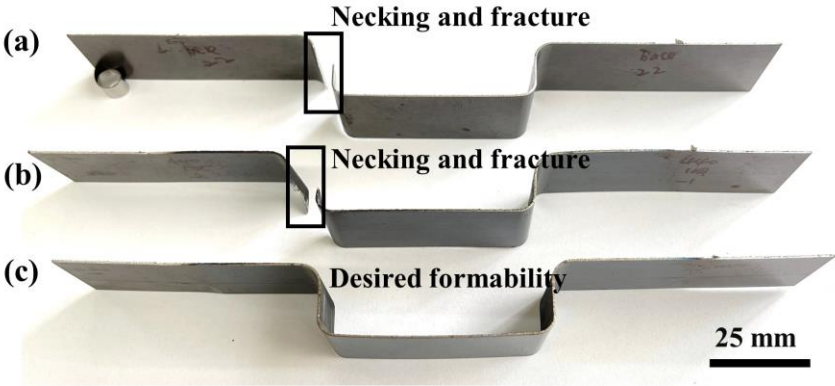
U-shape forming tests: (a) BM sample, (b) 170-I sample, and (c) 170-IV sample
